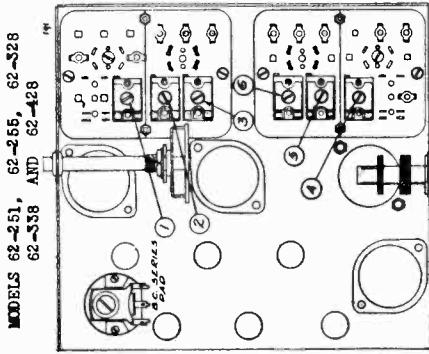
BOTTOM VIEW SHOWING TRIMMERS
